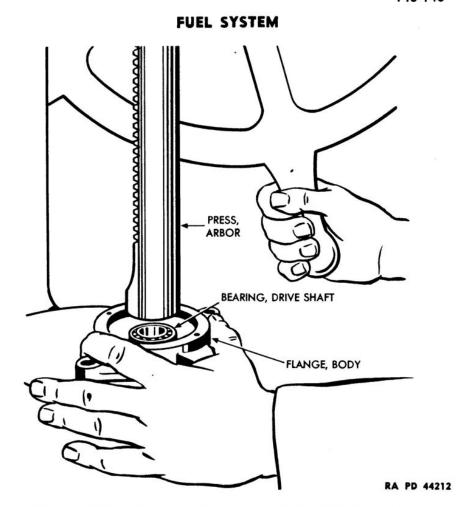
Pressing Governor Drive Shaft Bearing into Body Flange
